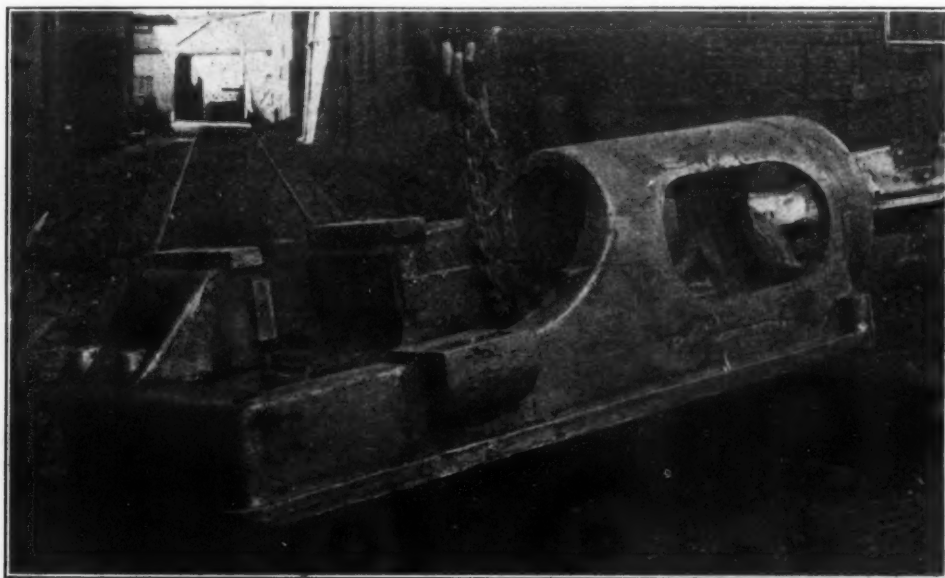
Gas Engine Bed Made Partly on Molding Machine and Rammed with Pneumatic Rammer.—Weight, 9300 Lb.
